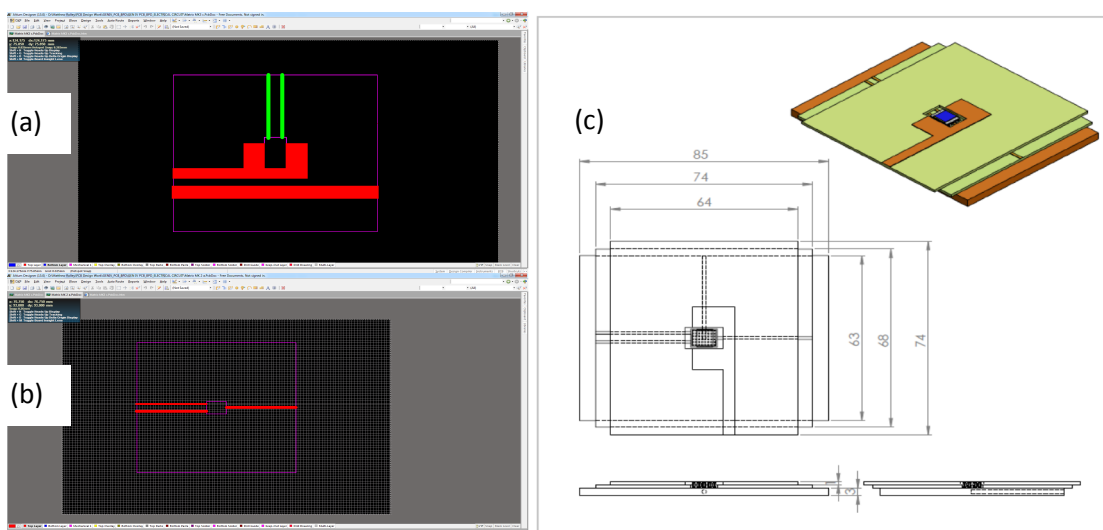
Electrical Altium PCB Layouts (a, b), and Solidworks CAD Drawing (c)
